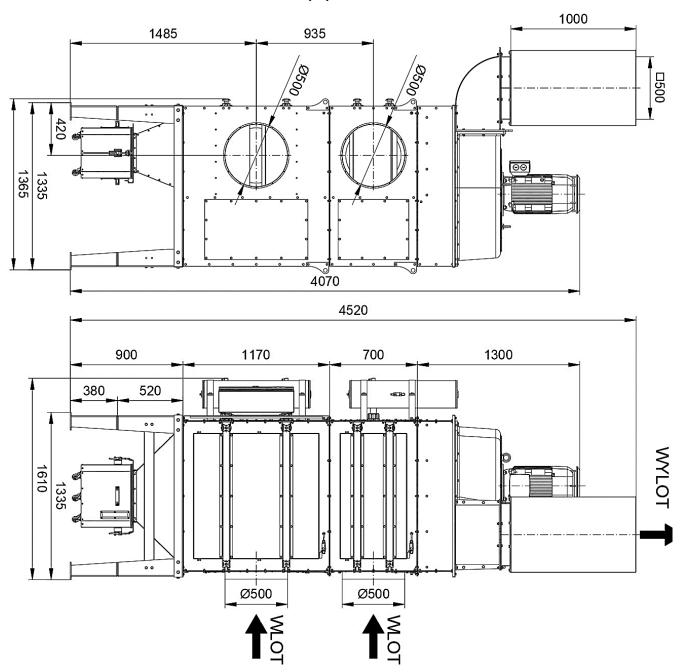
Overall dimensions of the device UFO-A-10000-N(/R)-RH (with an inlet on the right)
